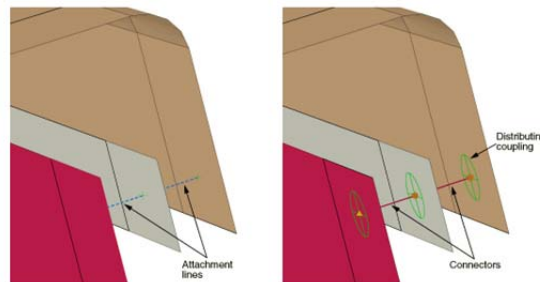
Abaqus/CAE Users Guide spot weld schematic.
